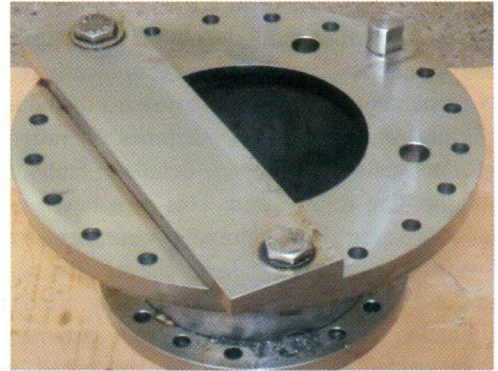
Fixture on which Magnet pole blocks were mounted and clamped while machining
